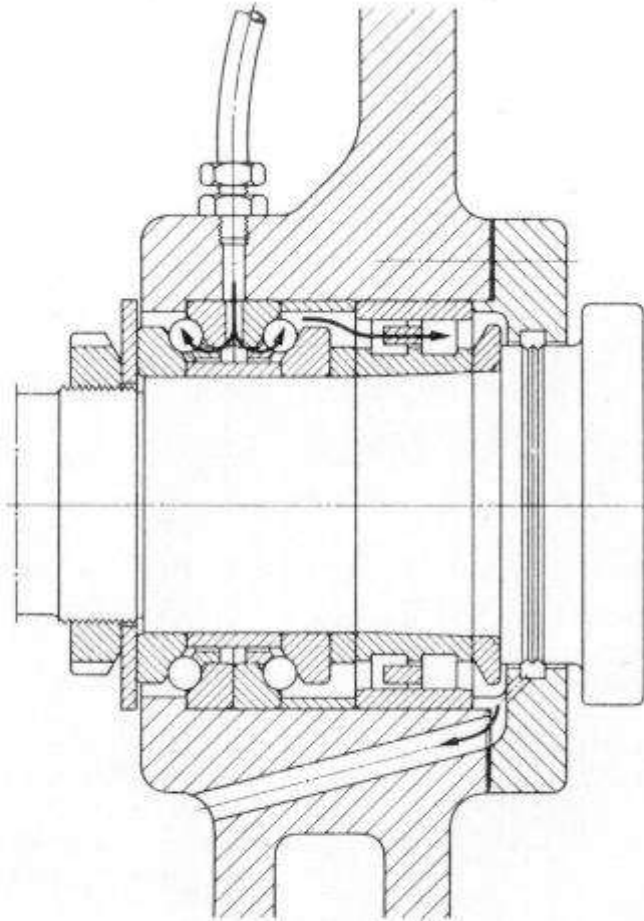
Circulating oil system for a spindle bearing arrangement incorporating one angular contact thrust ball bearing and one double row cylindrical roller bearing
